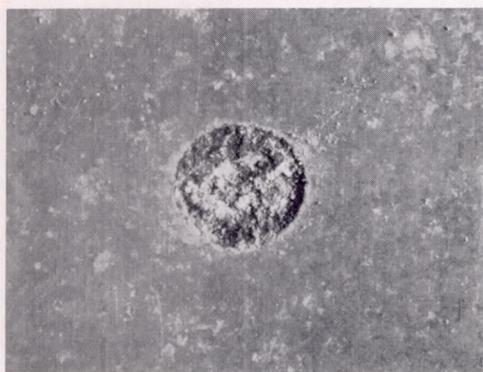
Type J. General, severe corrosive attack on spot welds, X3.
